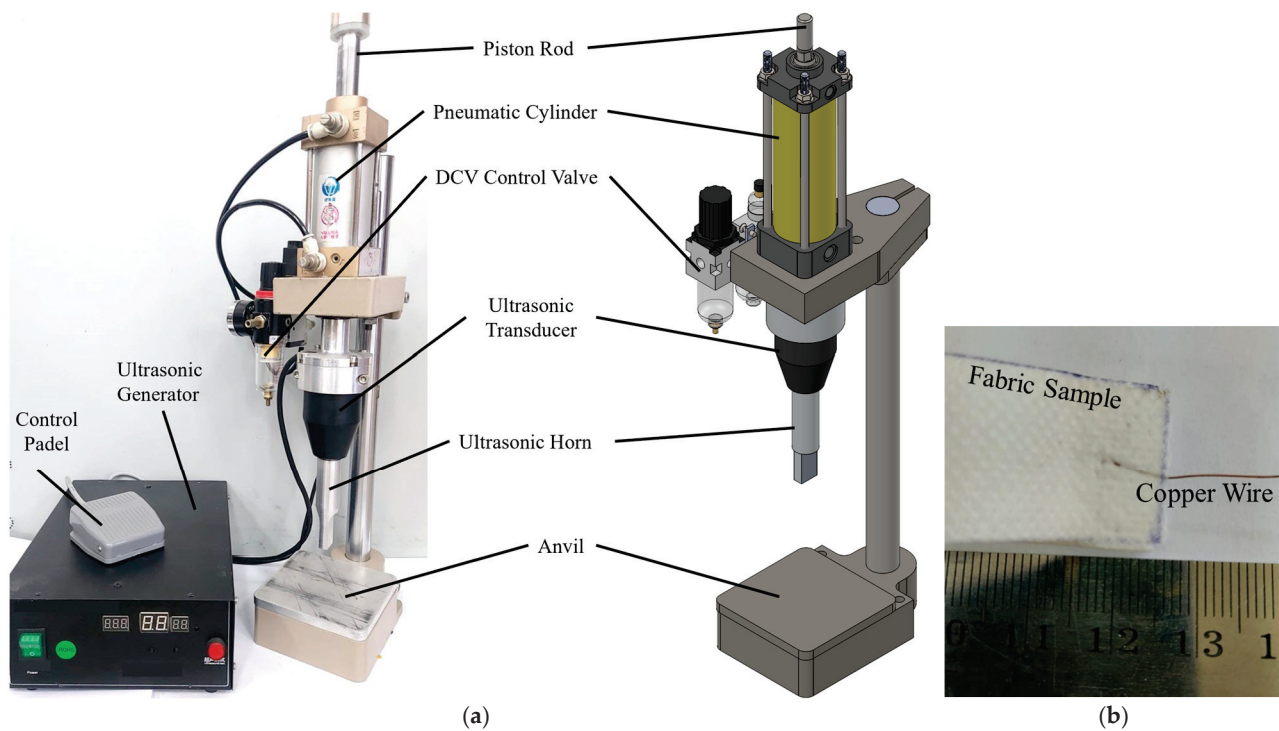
(a) Design and fabrication of UW machine; (b) produced ultrasonic welded sample for smart textile.
